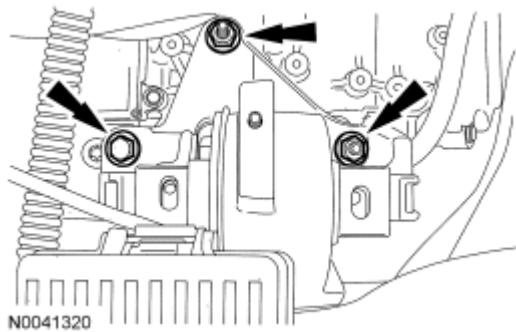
Locating Transaxle Insulator Bracket Nuts And Bolt
